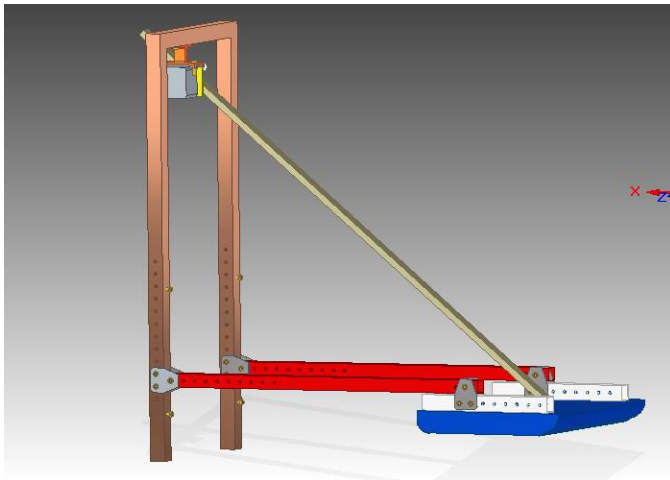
3-D assembly showing arrangement of wave clapper, motor and rack and pinion
